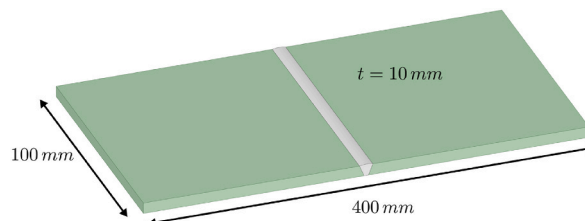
Welded plate structure considered for fatigue optimization.
